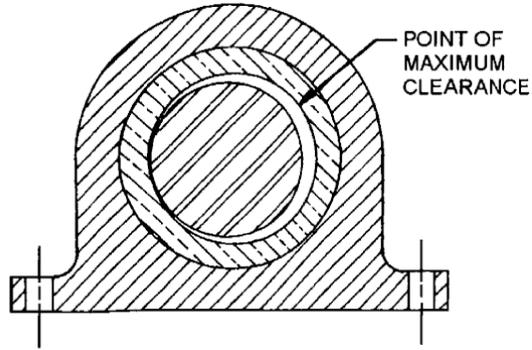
Corroded pillow block
